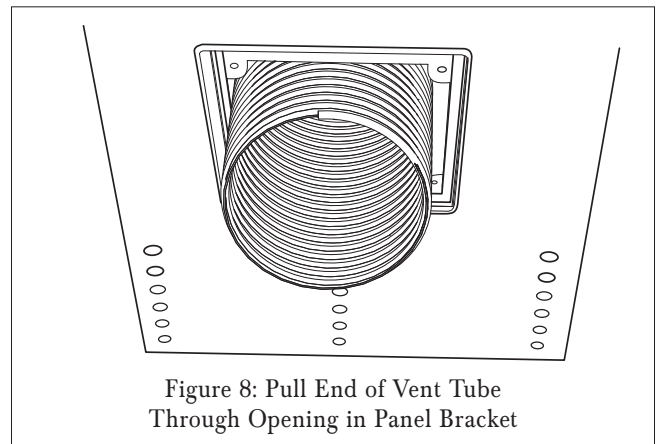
Pull End of Vent Tube Through Opening in Panel Bracket
